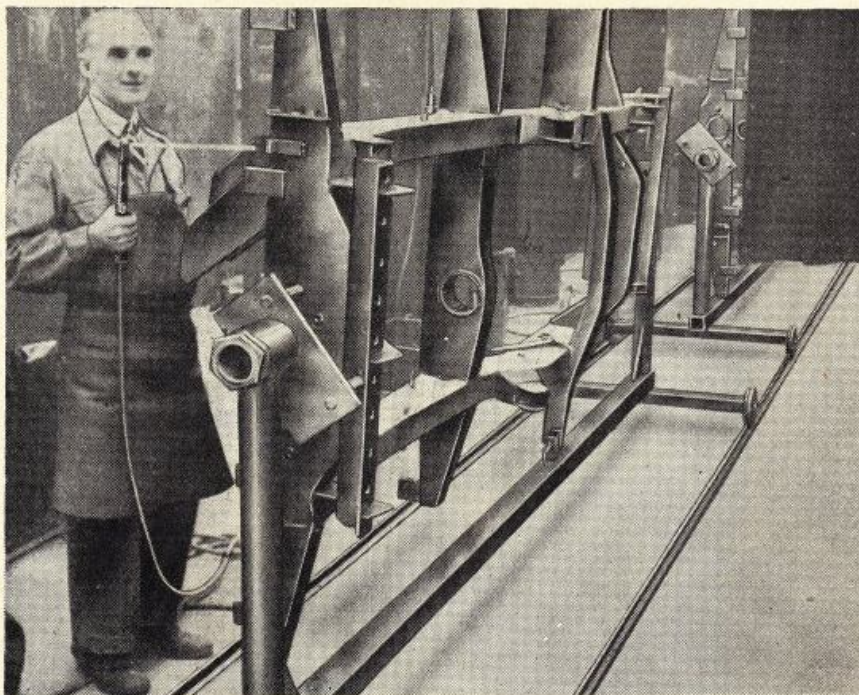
The Welding Work on the Chassis Frame is Completed on a Track, the Frames being so Mounted on Special Carriages that they may be Turned to Suit the Convenience of the Operators
